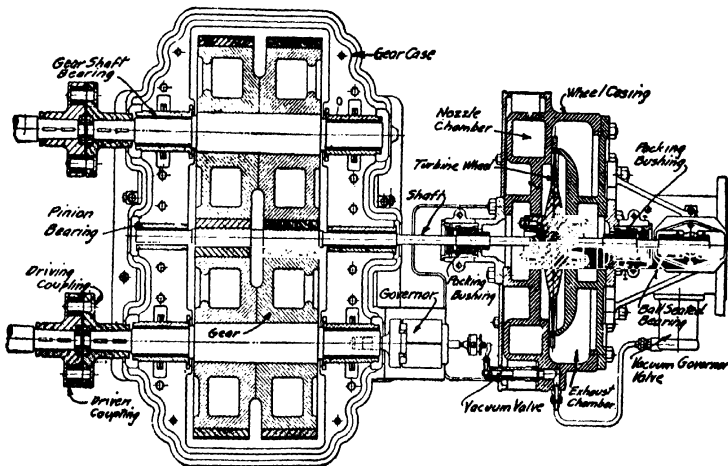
Horizontal Section of De Laval Double Geared Turbine.
